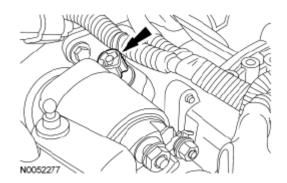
Locating Wiring Harness Retainer Courtesy of FORD MOTOR CO.
